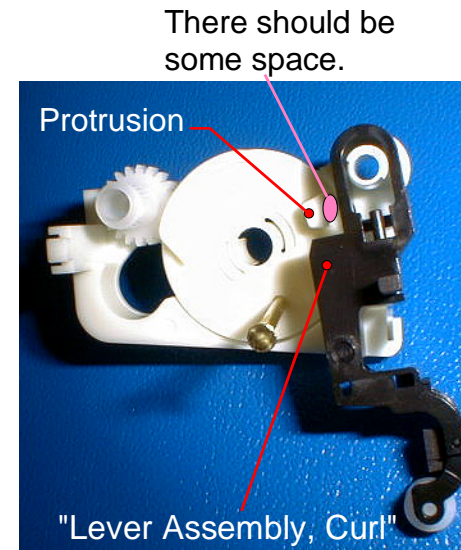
Setting "Lever Assembly, Curl(1)"
